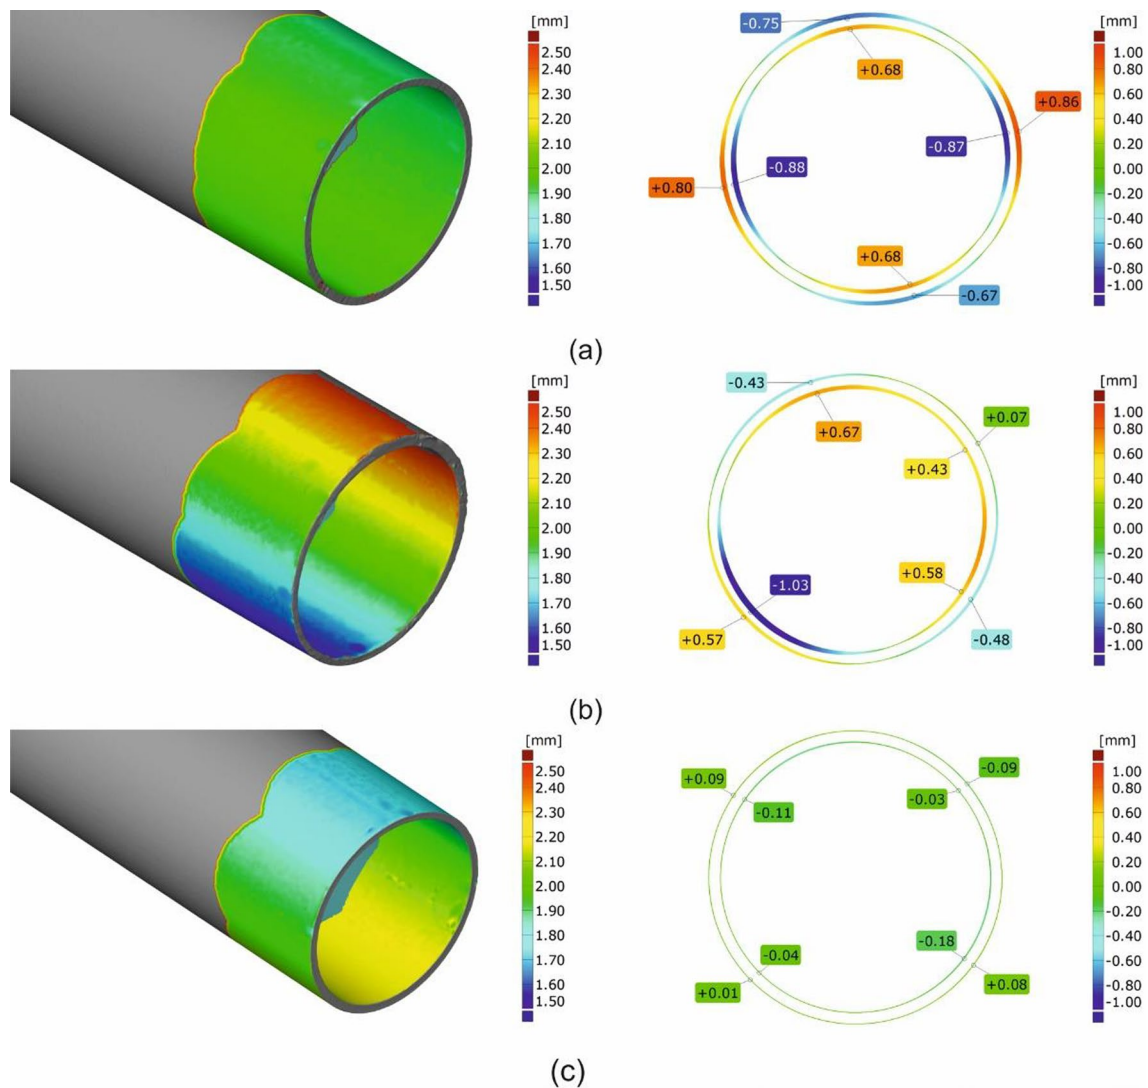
Photographs of  $\text{Ø}50 \times 2$  mm tube extruded from EN AW-7021 alloy using porthole dies of different geometries ([66] open access): a die No. 1, b die No. 2, c die No. 3
